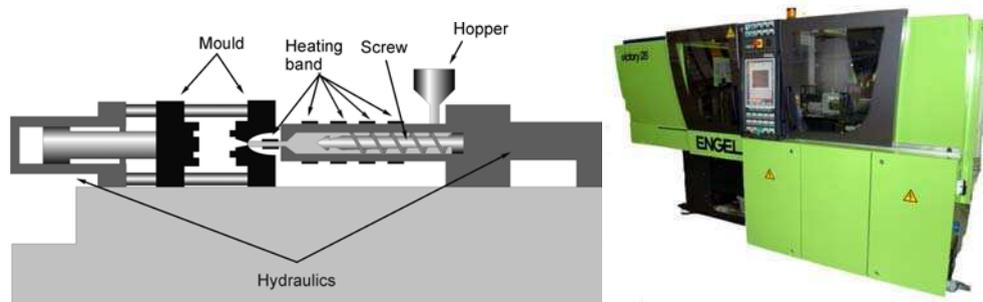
Left, cartoon of an injection moulding machine illustrating key components. Right, photo of an industrial injection moulding machine.
